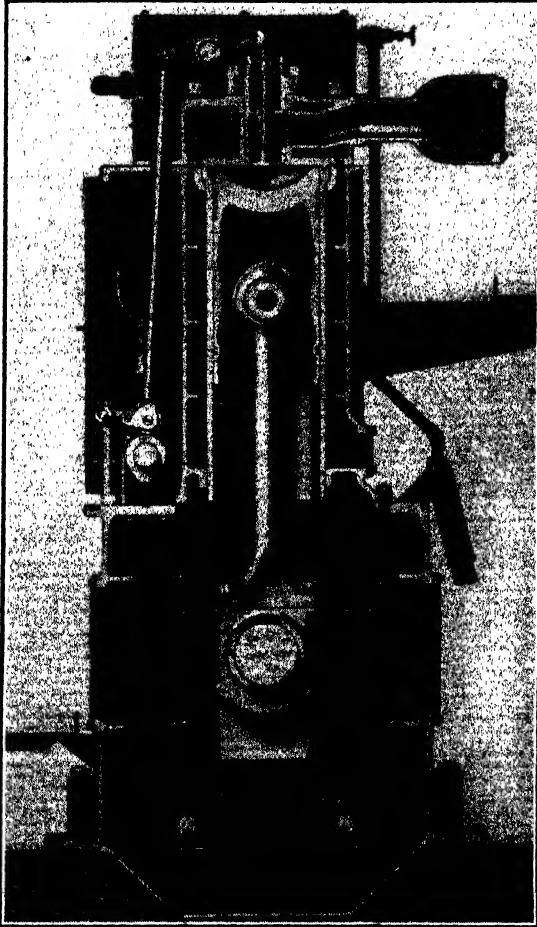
Steel connecting rod with circular section, machined all over, for large engine. Also note cylinder, valve, valve-operating mechanism, and piston design.
